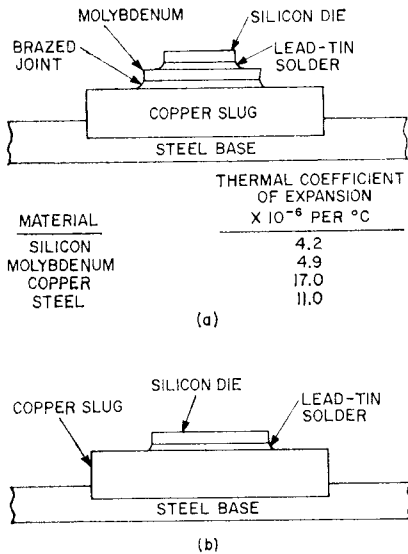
(a) Cross section of a transistor that uses a molybdenum expansion matcher between pellet and header; (b) cross section of a transistor in which pellet is soldered directly to copper.
